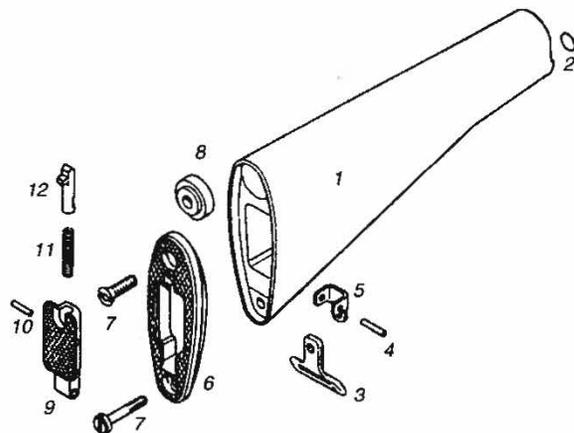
M16/AR15 fixed butt stock: 1) butt stock, 2) O-ring, 3) sling swivel, 4) hinge pin, 5) hinge, 6) butt plate, 7) butt plate screws (2), 8) butt plate spacer, 9) butt plate door, 10) retaining pin, 11) plunger spring and 12) plunger.
